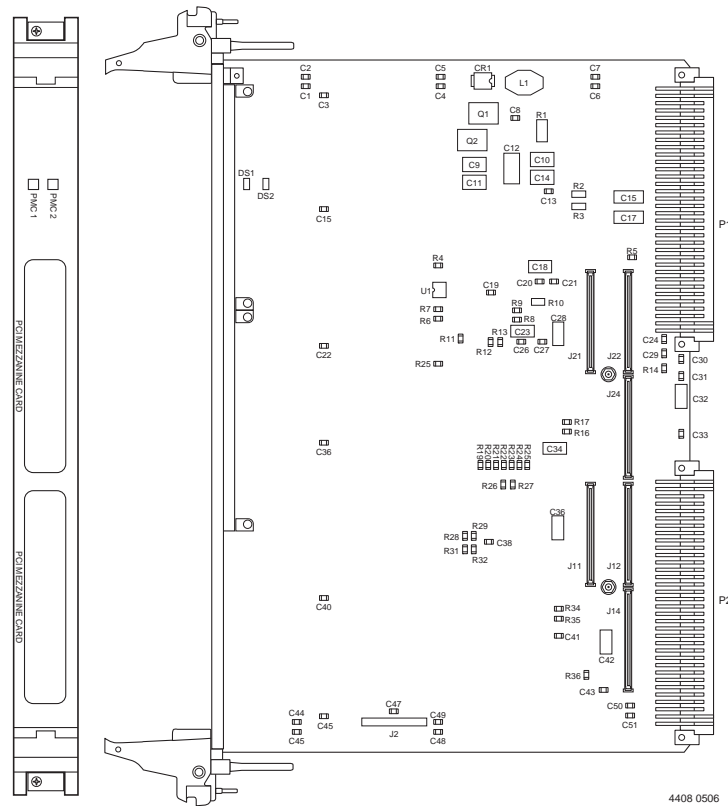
PMCspan16E-010 Component Layout and Front Panel
